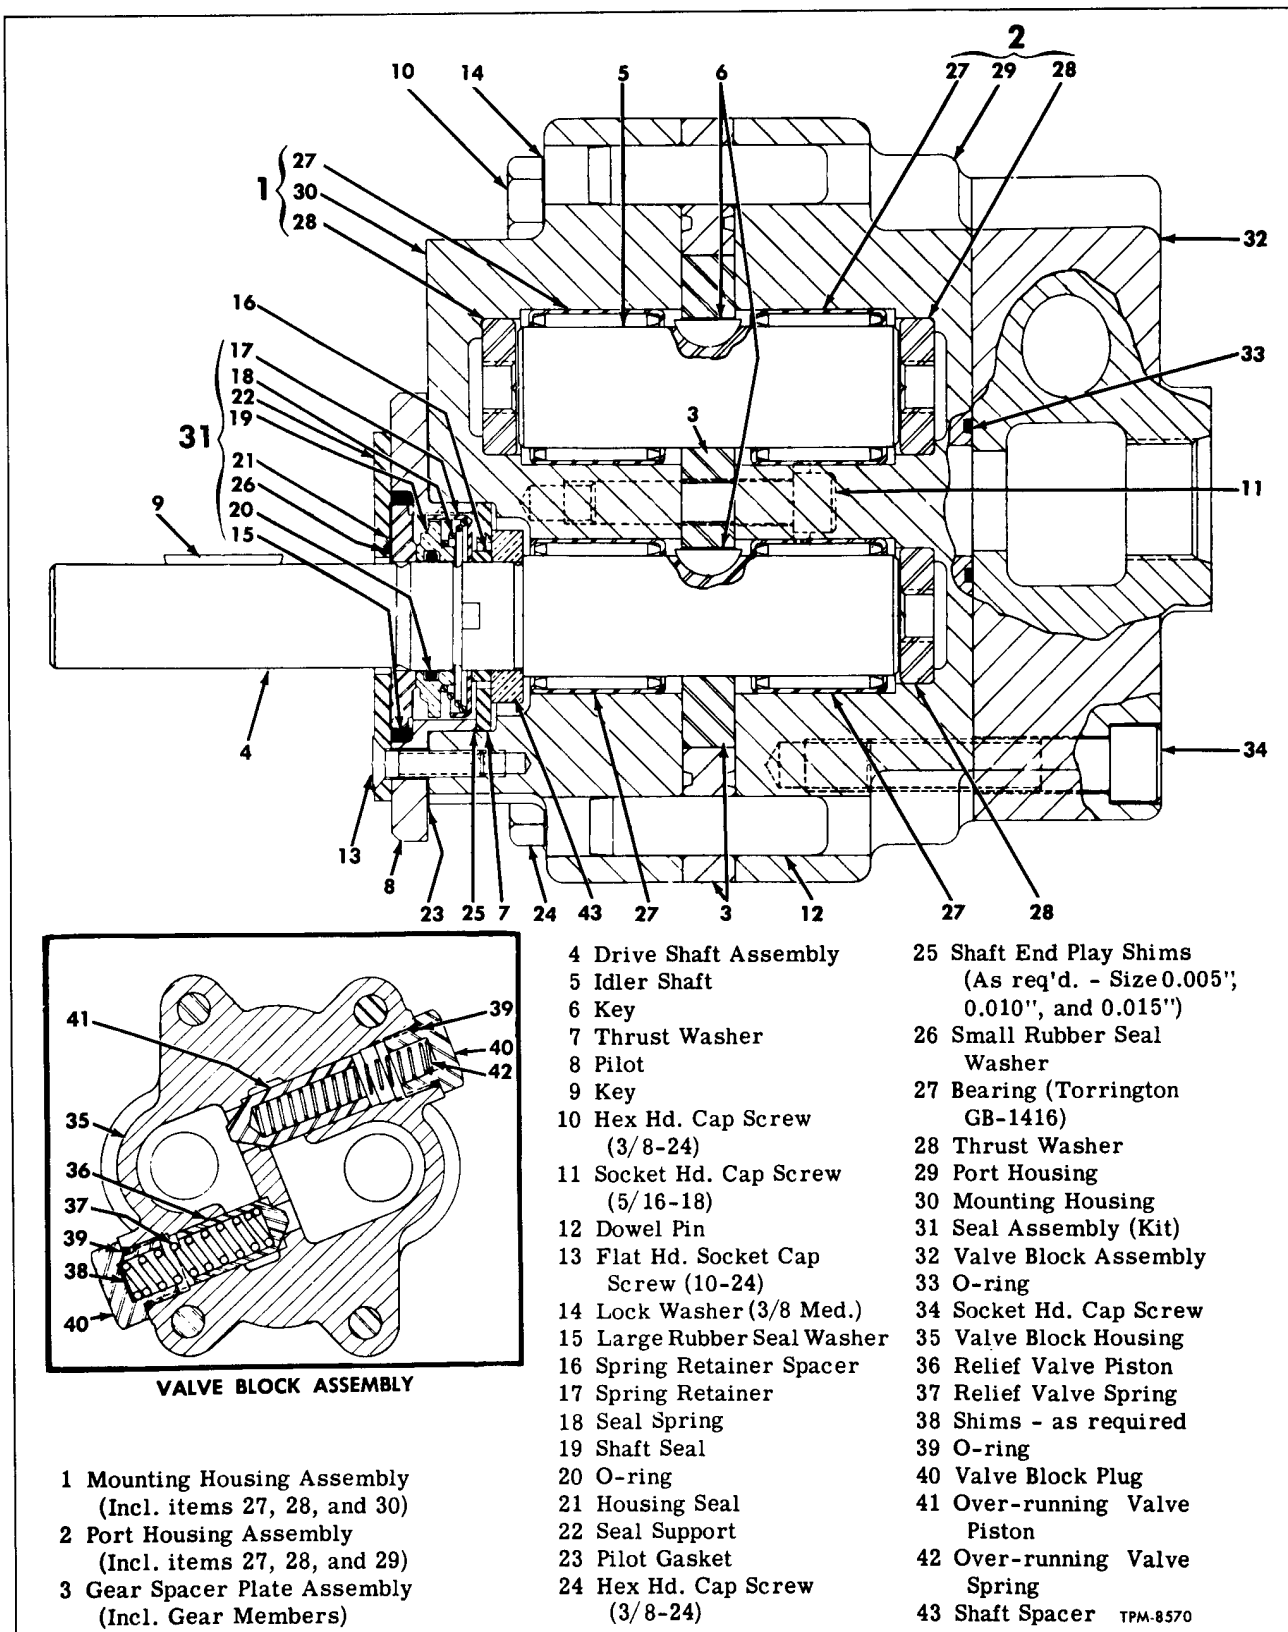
Sectional View of Condenser Fan Drive Fluid Motor
